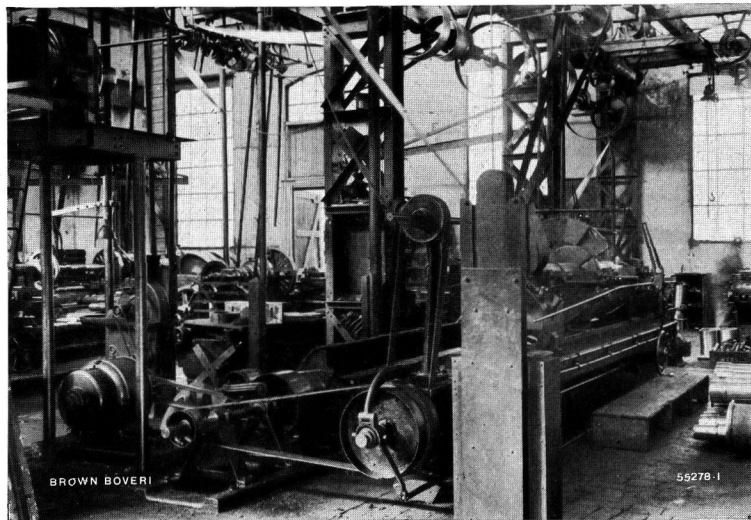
Landis cylindrical grinding machine with antiquated lineshaft drive and a single driving motor.
